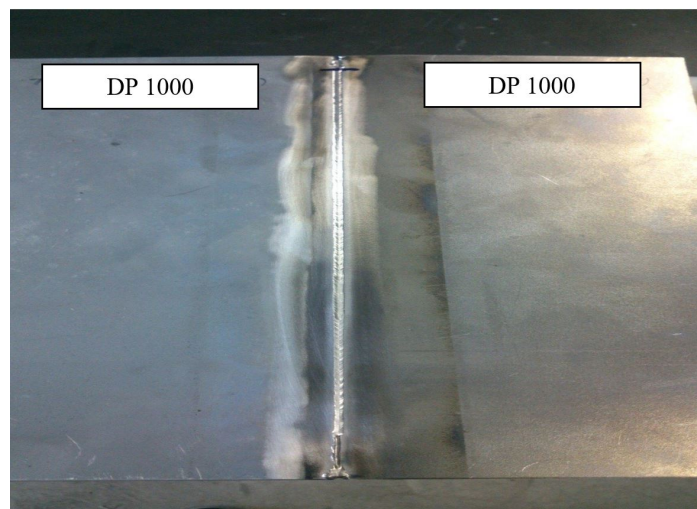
DP 1000-DP 1000 welding sample.
